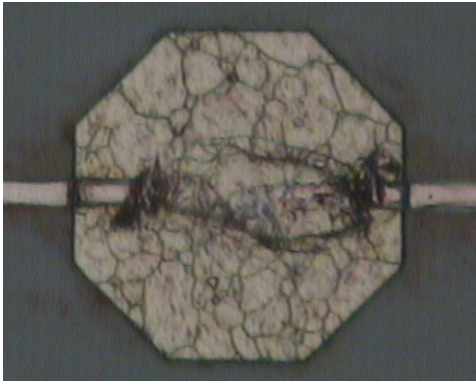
Bump pad on wrong layer, trace removed by bump bonding.
